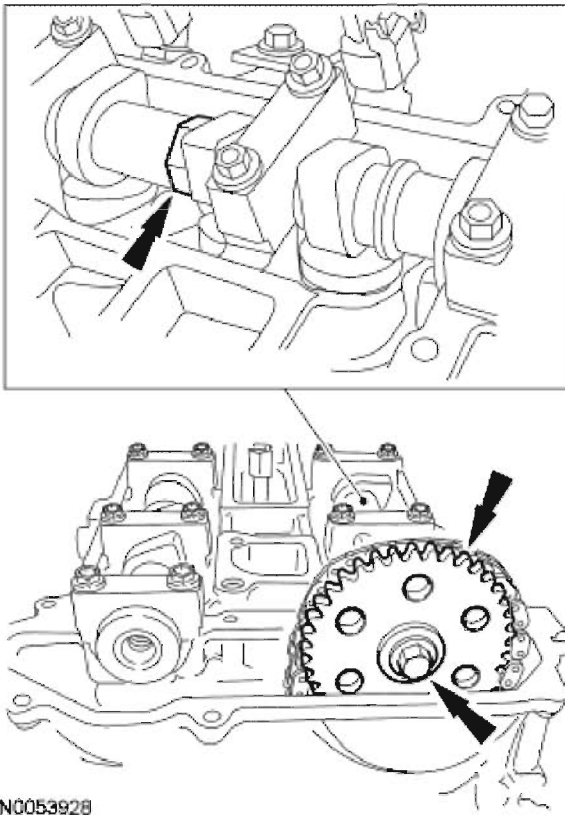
Locating Bolt & Exhaust Camshaft Drive Gear
